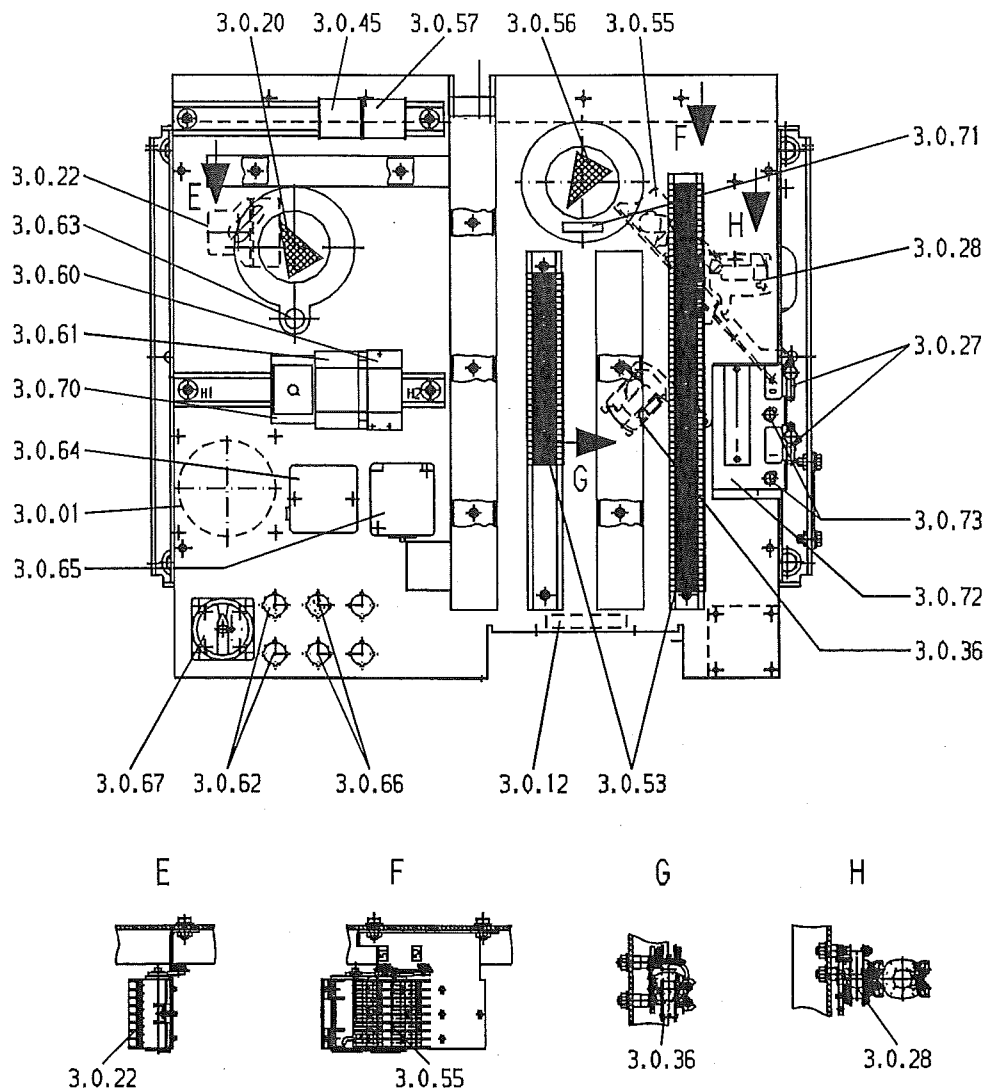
b: FK 3-.. spring operating mechanism... (auxiliary equipment)
